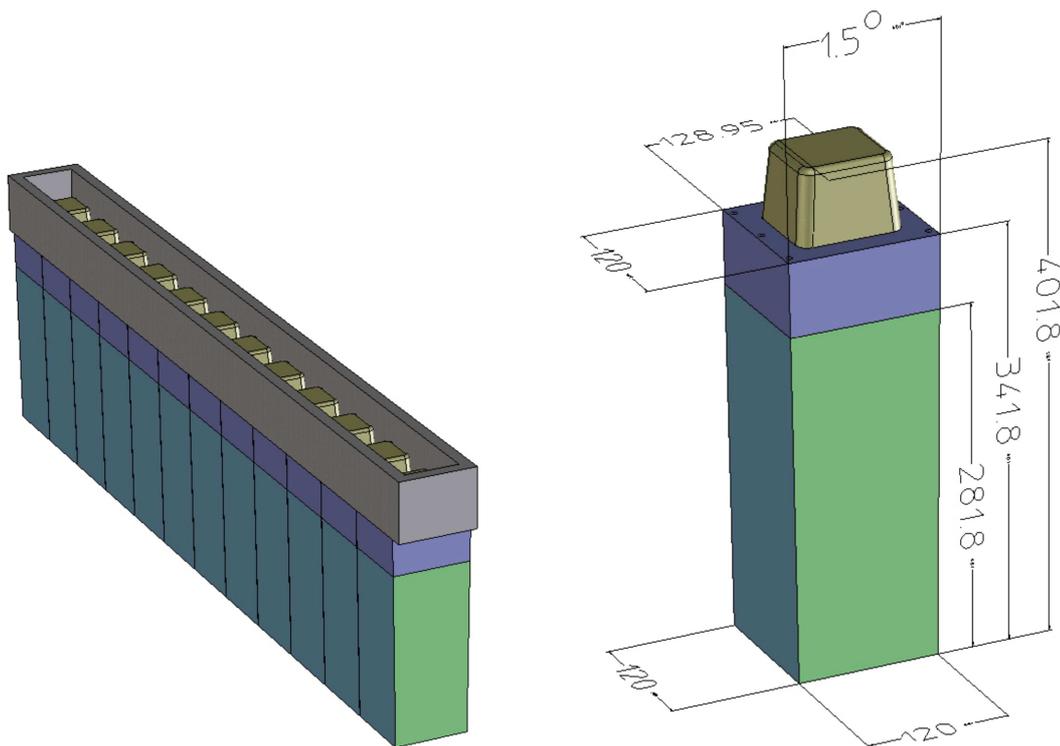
A single 1.5° taper module (right hand side) with the dimensions of the prototype shown in mm. The left hand figure shows a single strip module comprised of 12 EMCal modules integrated onto a single strong back.
